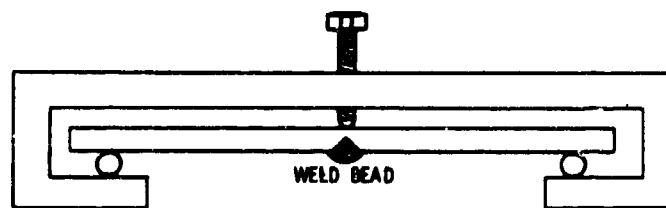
Schematic of bent-beam weldment under three-point loading.
